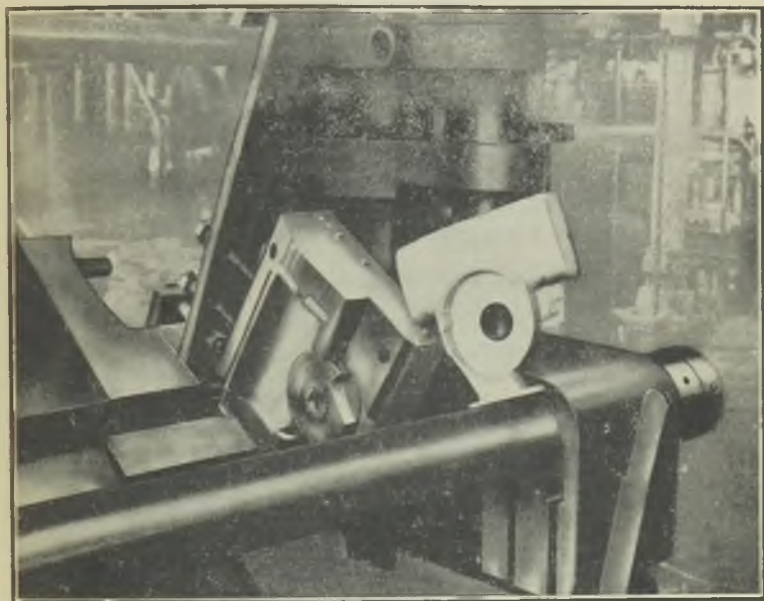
LARGE MACHINE. CLOSE-UP OF DIE IN PLACE WITH CASTING JUST EJECTED.
